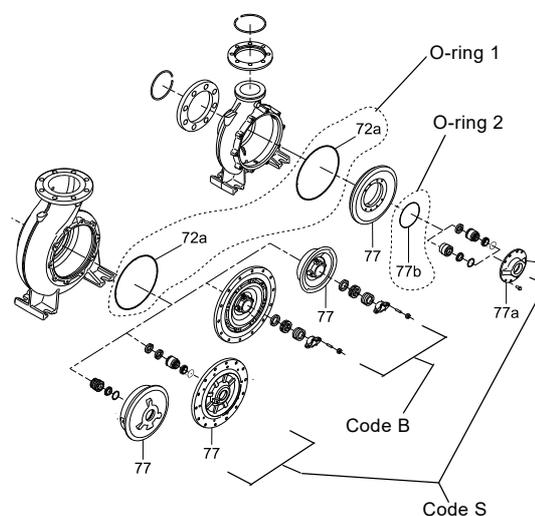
Static pump O-rings for seal arrangement "S" and "B"
